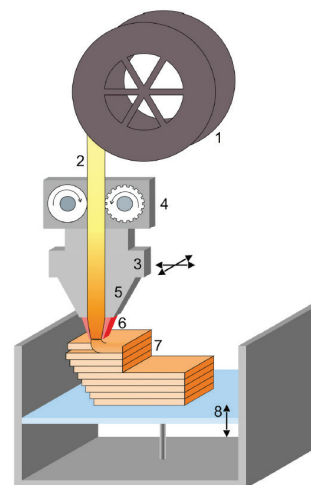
Schematic illustration of the material extrusion process: (1) spooled material, (2) filament, (3) heated deposition unit consisting of (4) counter-rotating driving wheels, (5) a liquefier, (6) a nozzle, (7) element fabricated in a layer-by-layer manner, (8) vertically movable build platform [5]
